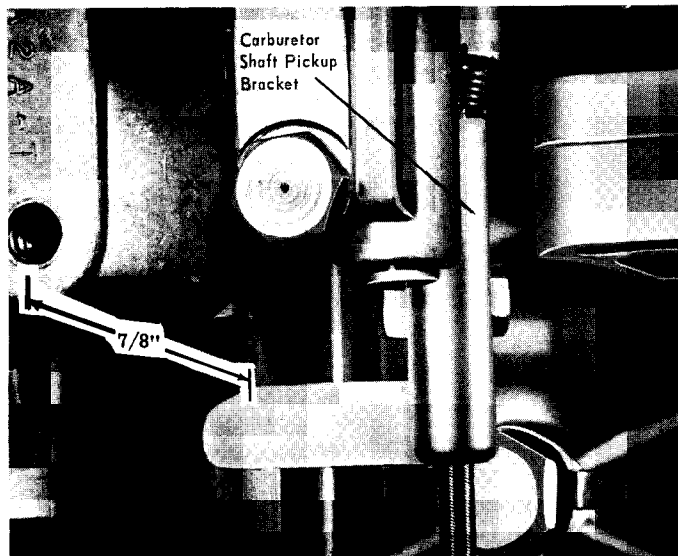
Carburetor Shaft Reverse Pickup Bracket Adjustment
